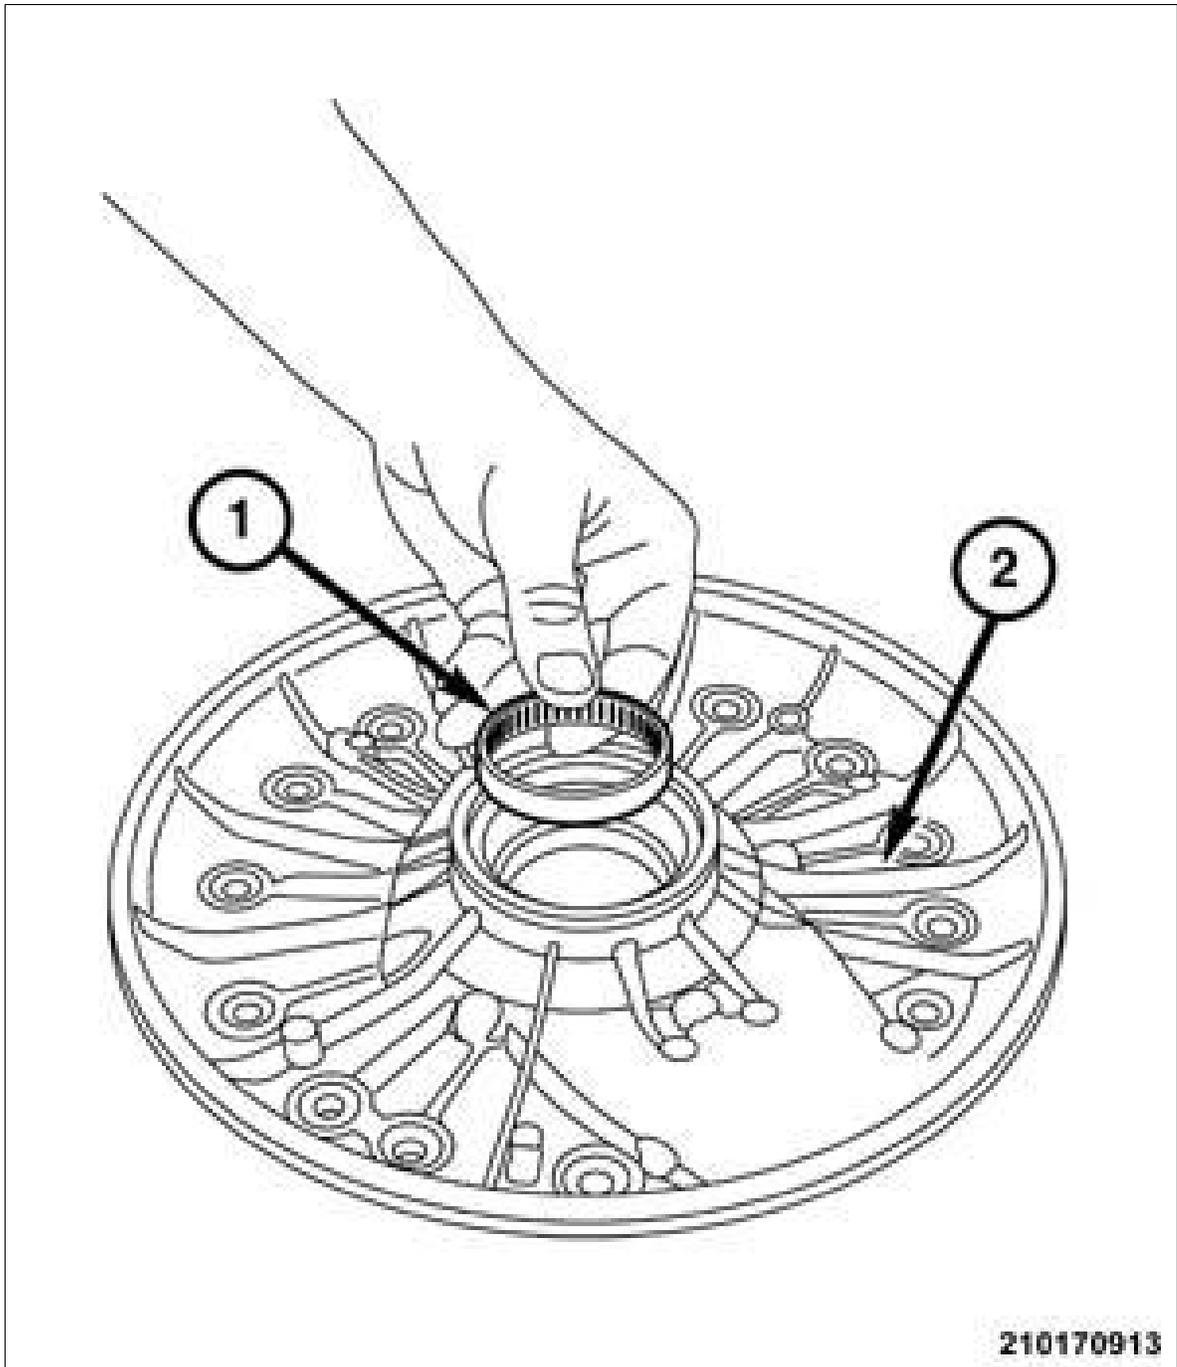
Oil Pump Cover Lip Seal & Oil Pump Cover
